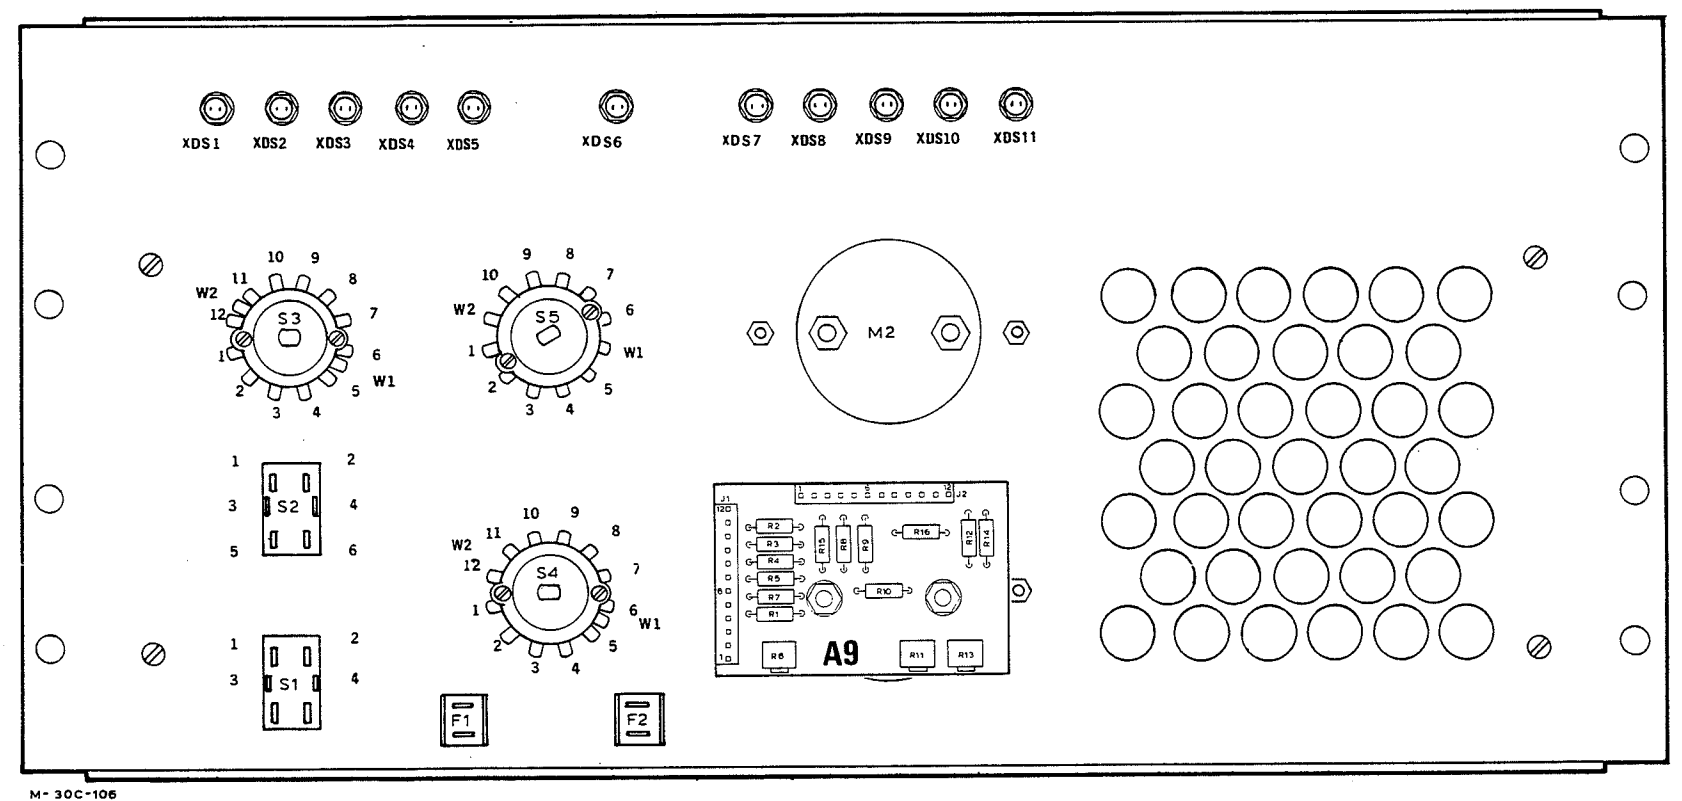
Assembly Detail - AMPFET P400 Transmitter (Rear View of Front Panel)
